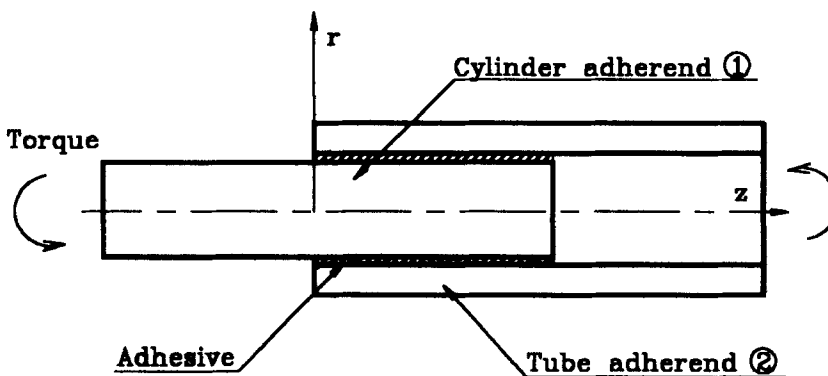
Shape of the adhesive bonded tubular single lap joint.
